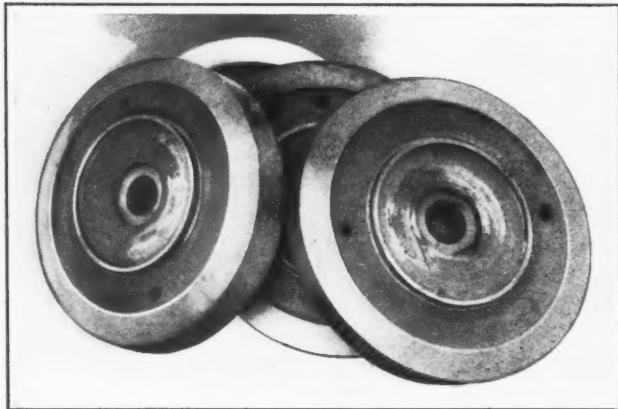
Flywheels, 24 Inches in Diameter, Machined with Set-up Shown in Fig. 7
